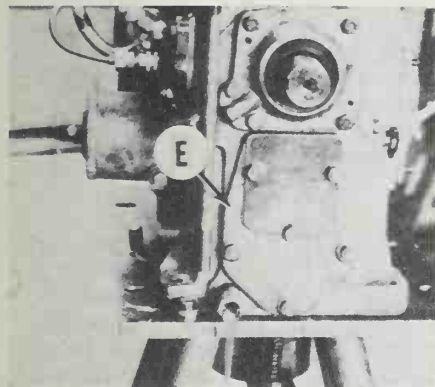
Remove end cover (E) for access to governor and oil pump.
